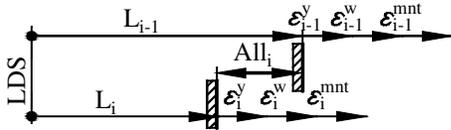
Compensable errors when evaluating machining allowance tolerances
